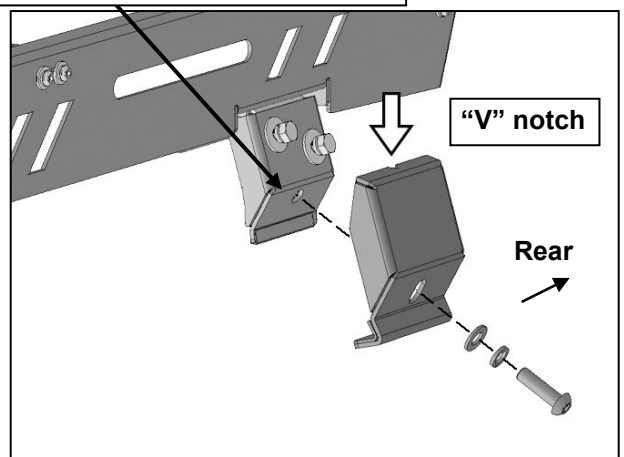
Attach Center Bracket Clamp Cover to driver/left #2 & #3 Inner Mounting Brackets (driver/left #3 Bracket pictured)
